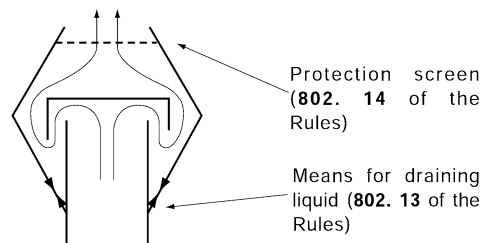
Example of Construction of Vent Discharge Outlet
